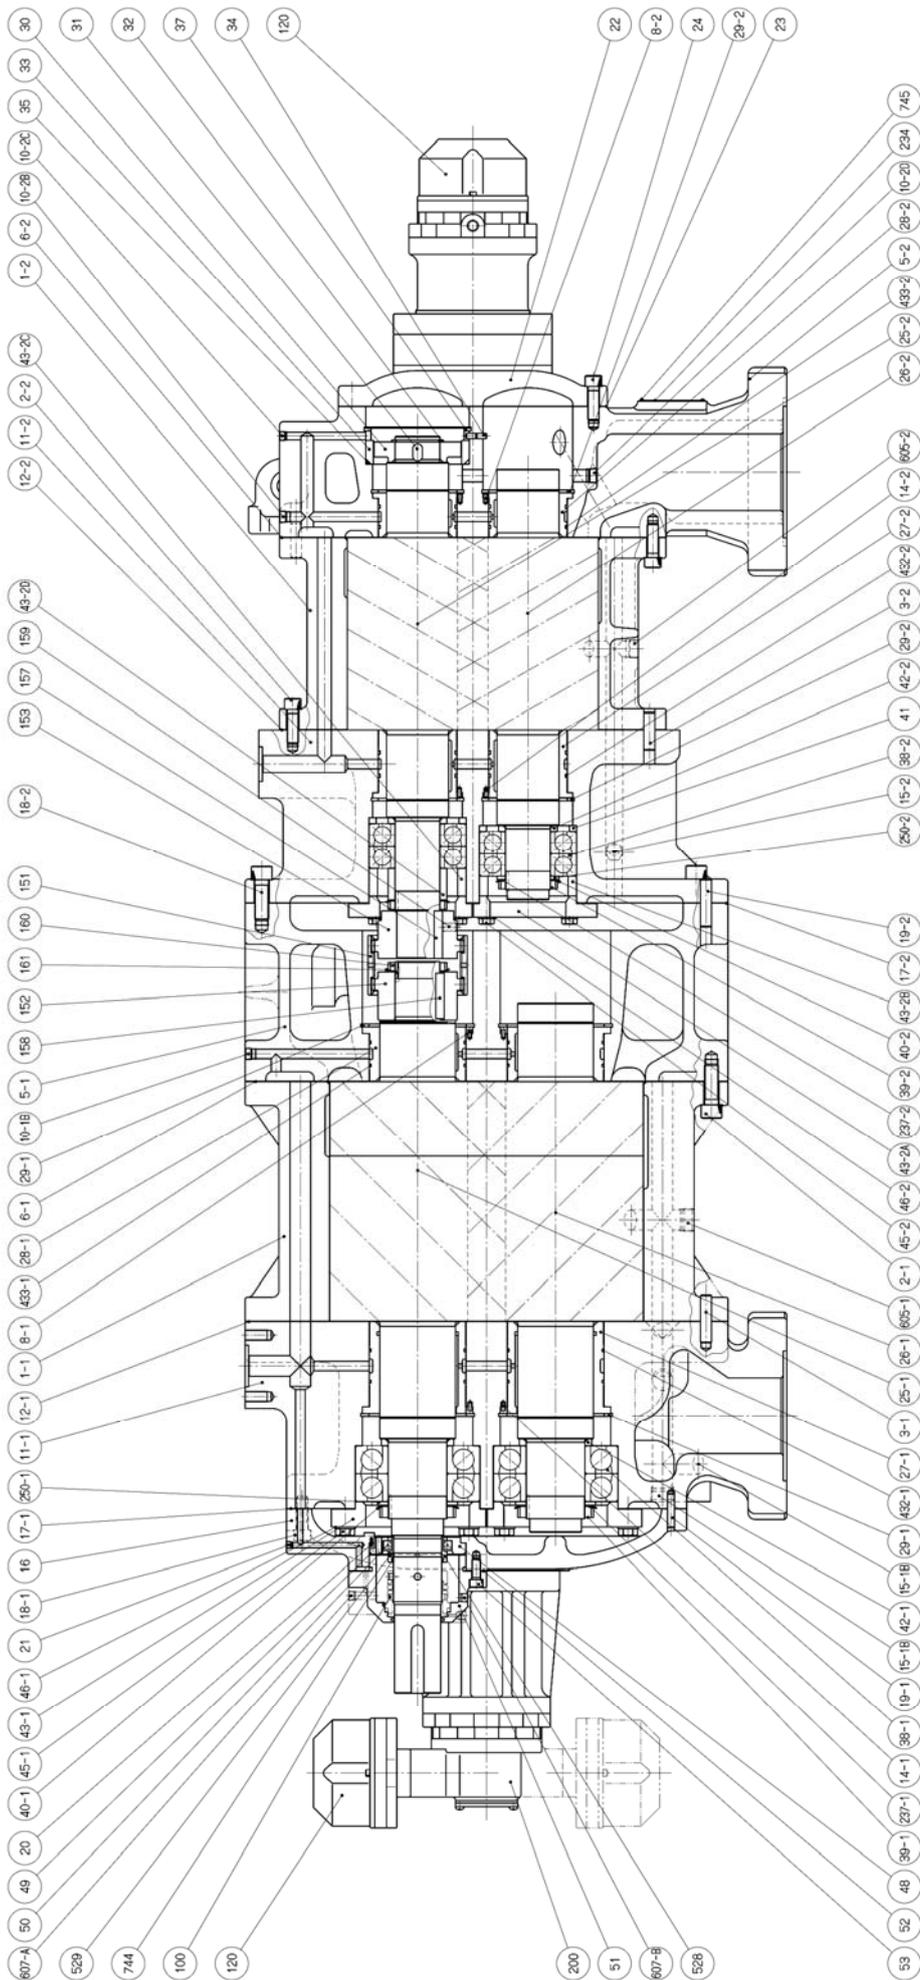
2520MMC Assembly Sectional View (Horizontal)
